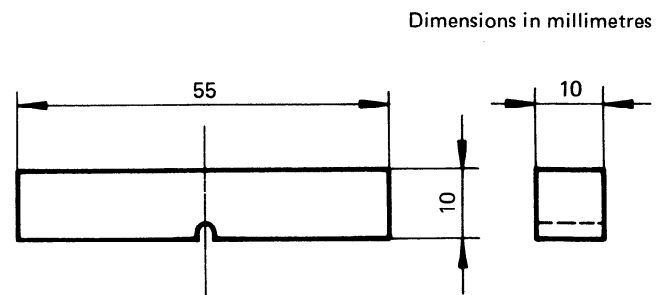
Dimensions of Messager U-notch test piece for the impact test
